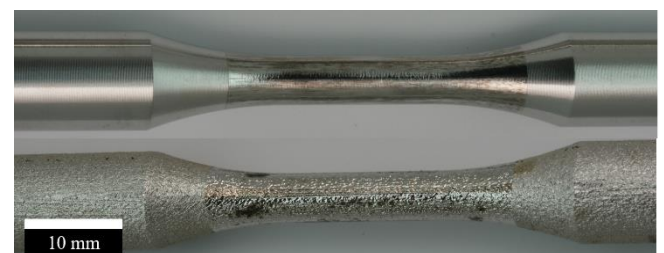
Conventionally machined (top) and LPBF (bottom) fatigue specimens that have been laser polished.
